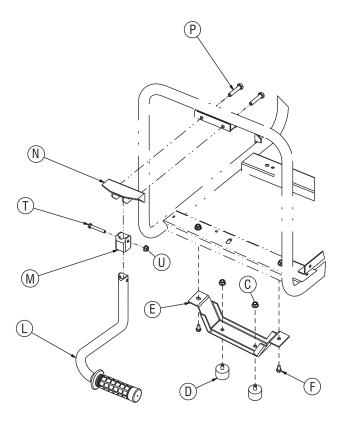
C – Foot Assembly (GP5000/GP6000E/GP6500E)
